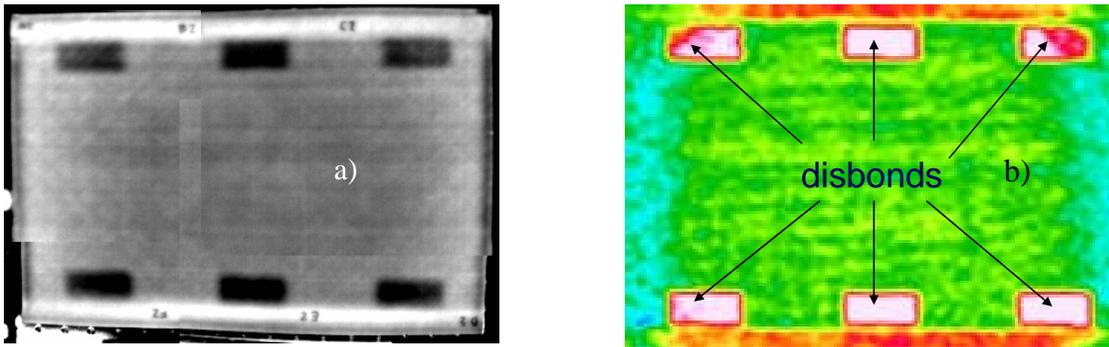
NDI inspection of the fabricated sandwich panels (460mm X 280mm) with removed adhesive in six simulated disbonded areas of 25mm X 50 mm using a) Thermography b) Ultrasonic Inspection
